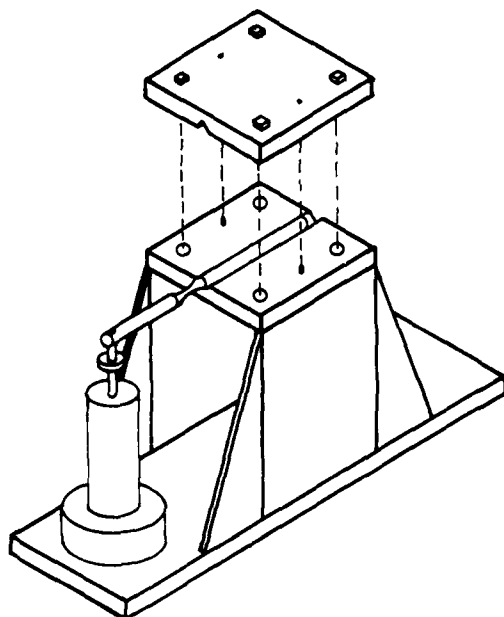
Enlarged View of Fatigue Specimen Support Structure and Load Cylinder.
